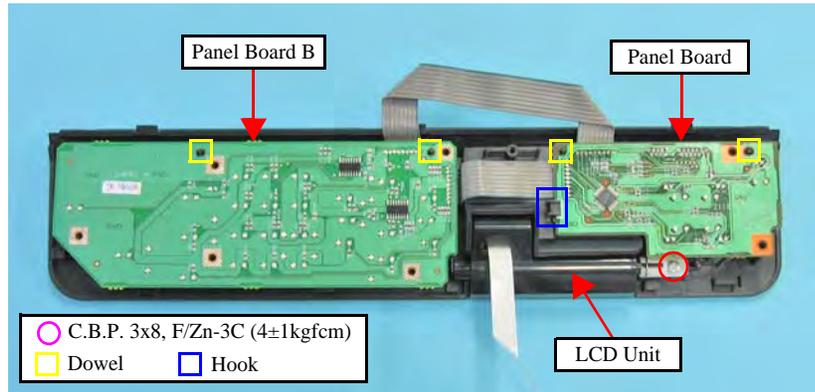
Removing the Panel Board/Panel Board B and LCD Unit
